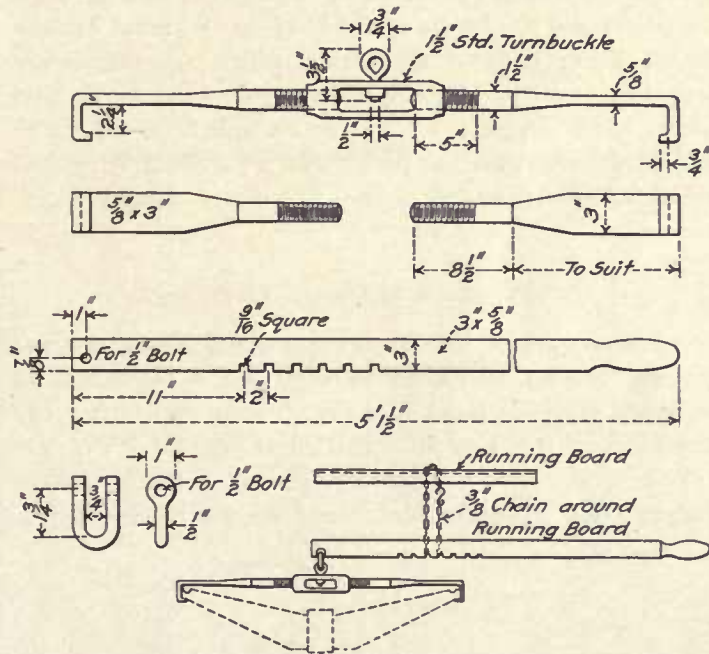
Lever and Clamp for Removing or Applying Driving Springs.
